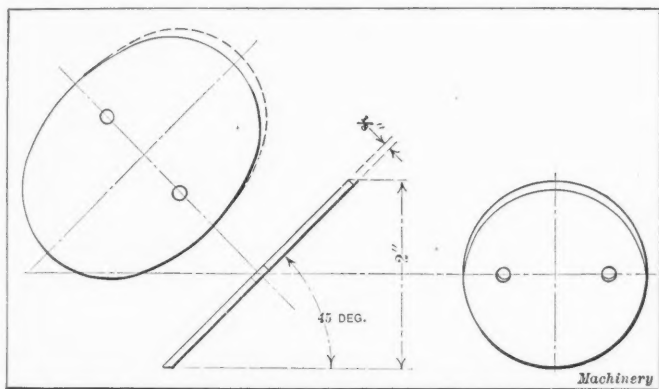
Oval Butterfly Governor Valve for Gasoline Engine
